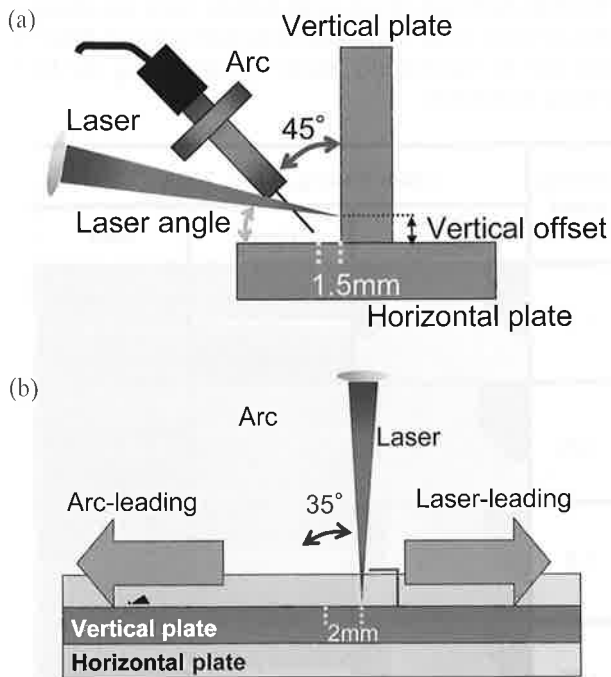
Schematics illustration of the setup of a hybrid welding
